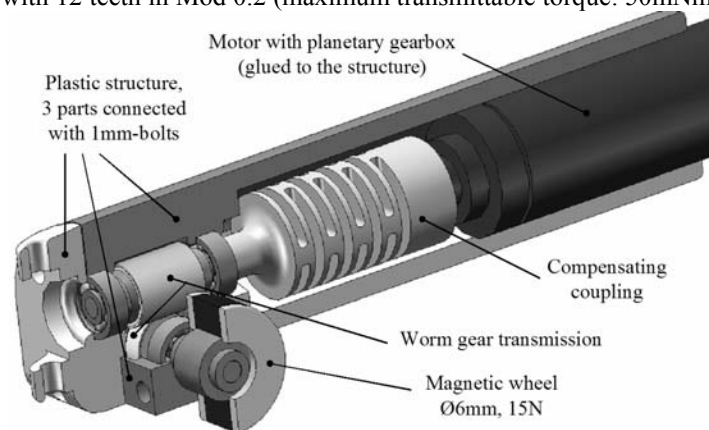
CAD-model of the traction unit, with motor, worm gear transmission and magnetic wheels.
